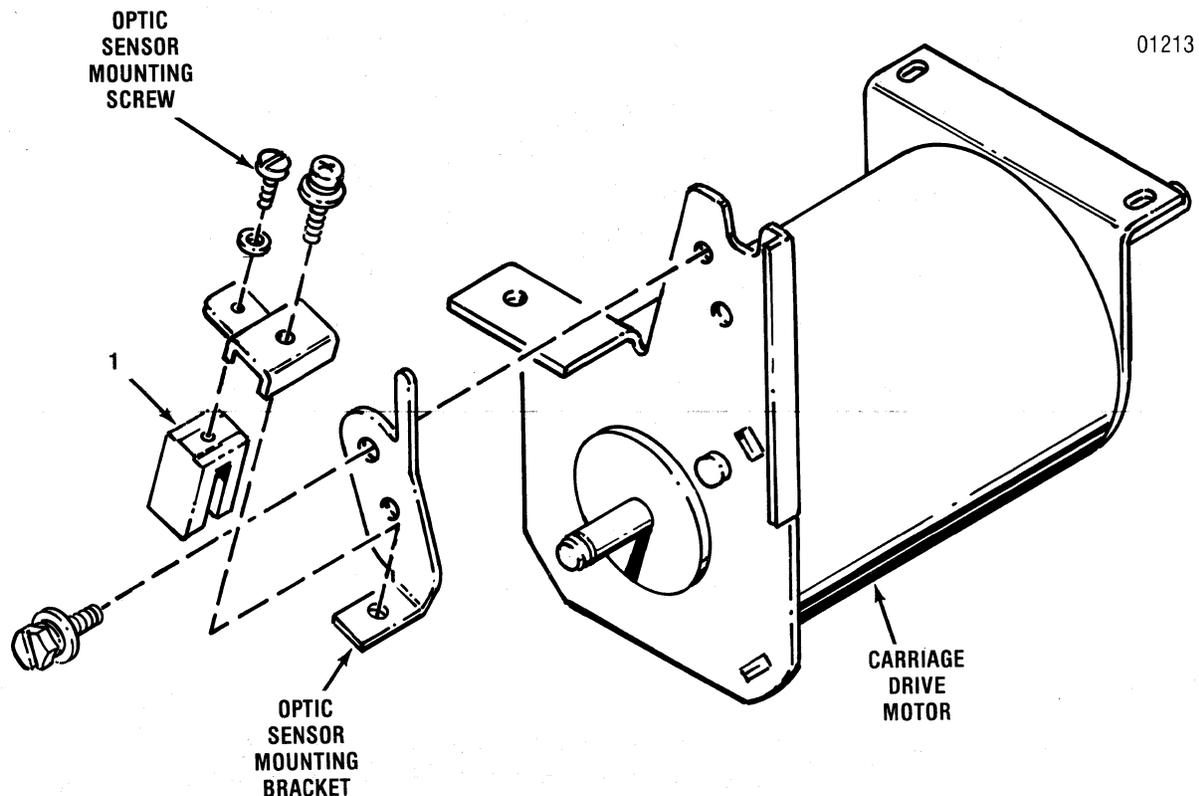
REMOVAL/REPLACEMENT, OPTIC SENSOR ASSEMBLY
